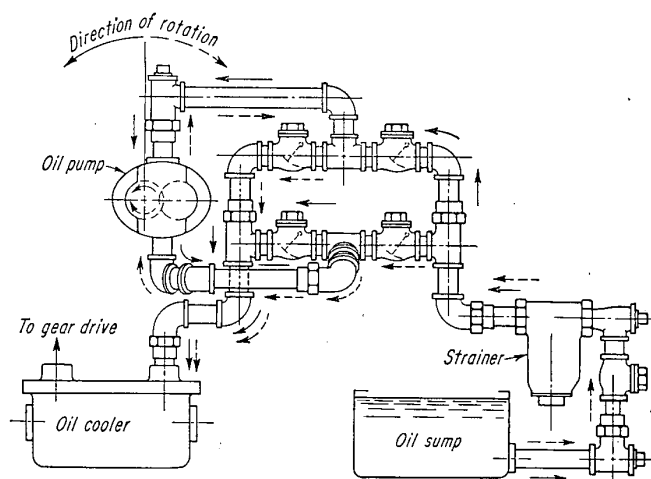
Check-valve arrangement for dual direction of rotation.
